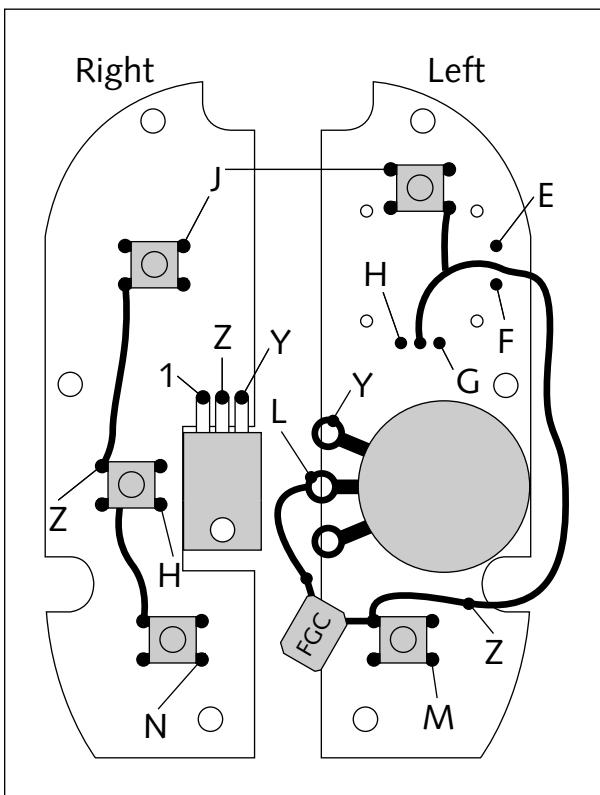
Wiring on the backs of the left and right control boards.
